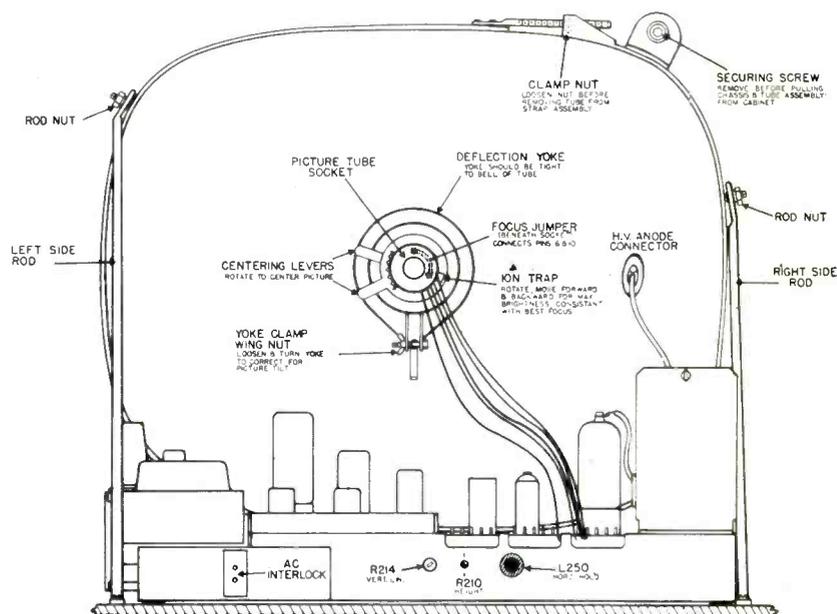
REAR VIEW, PICTURE TUBE AND CHASSIS BOARD ASSEMBLY
